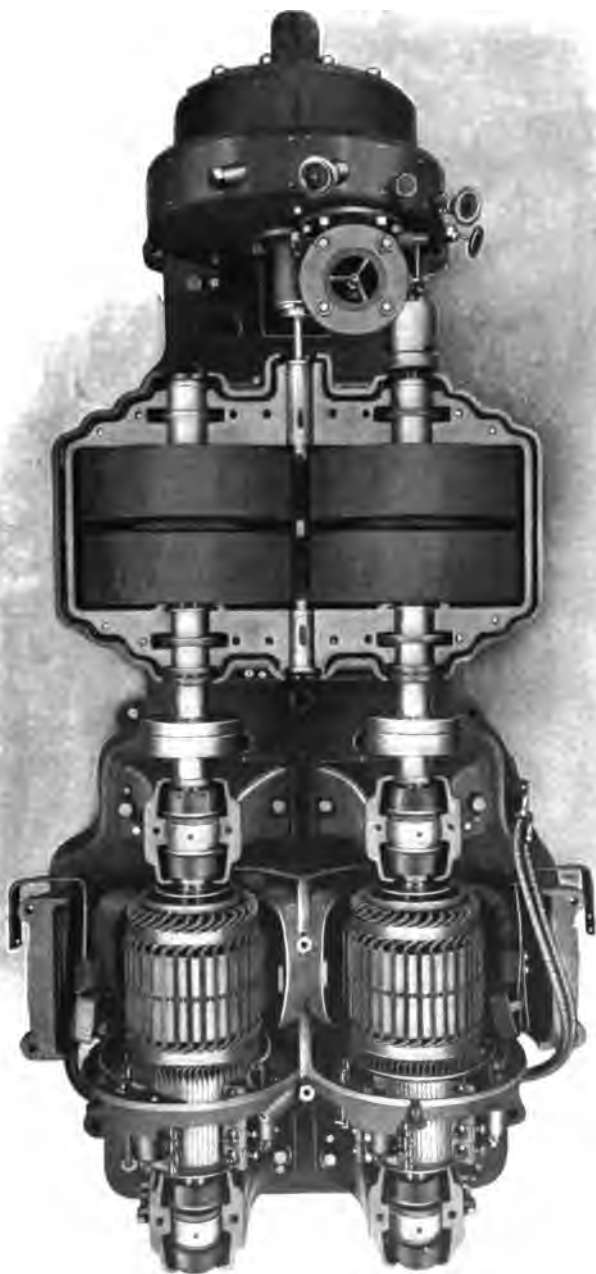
H.P. DE LAVAL STEAM TURBO-DYNAMO—UPPER HALF OF GEAR CASE AND FIELD FRAME REMOVED.
